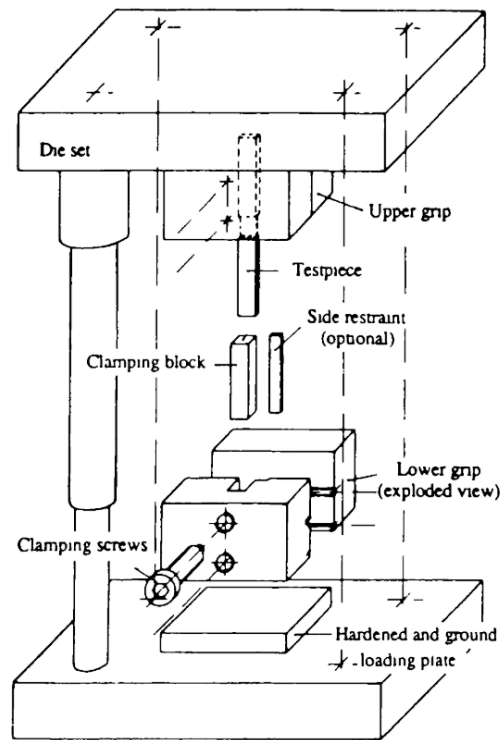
A schematic exploded view of the Imperial College compression testing fixture ICSTM, reproduced from [121]
